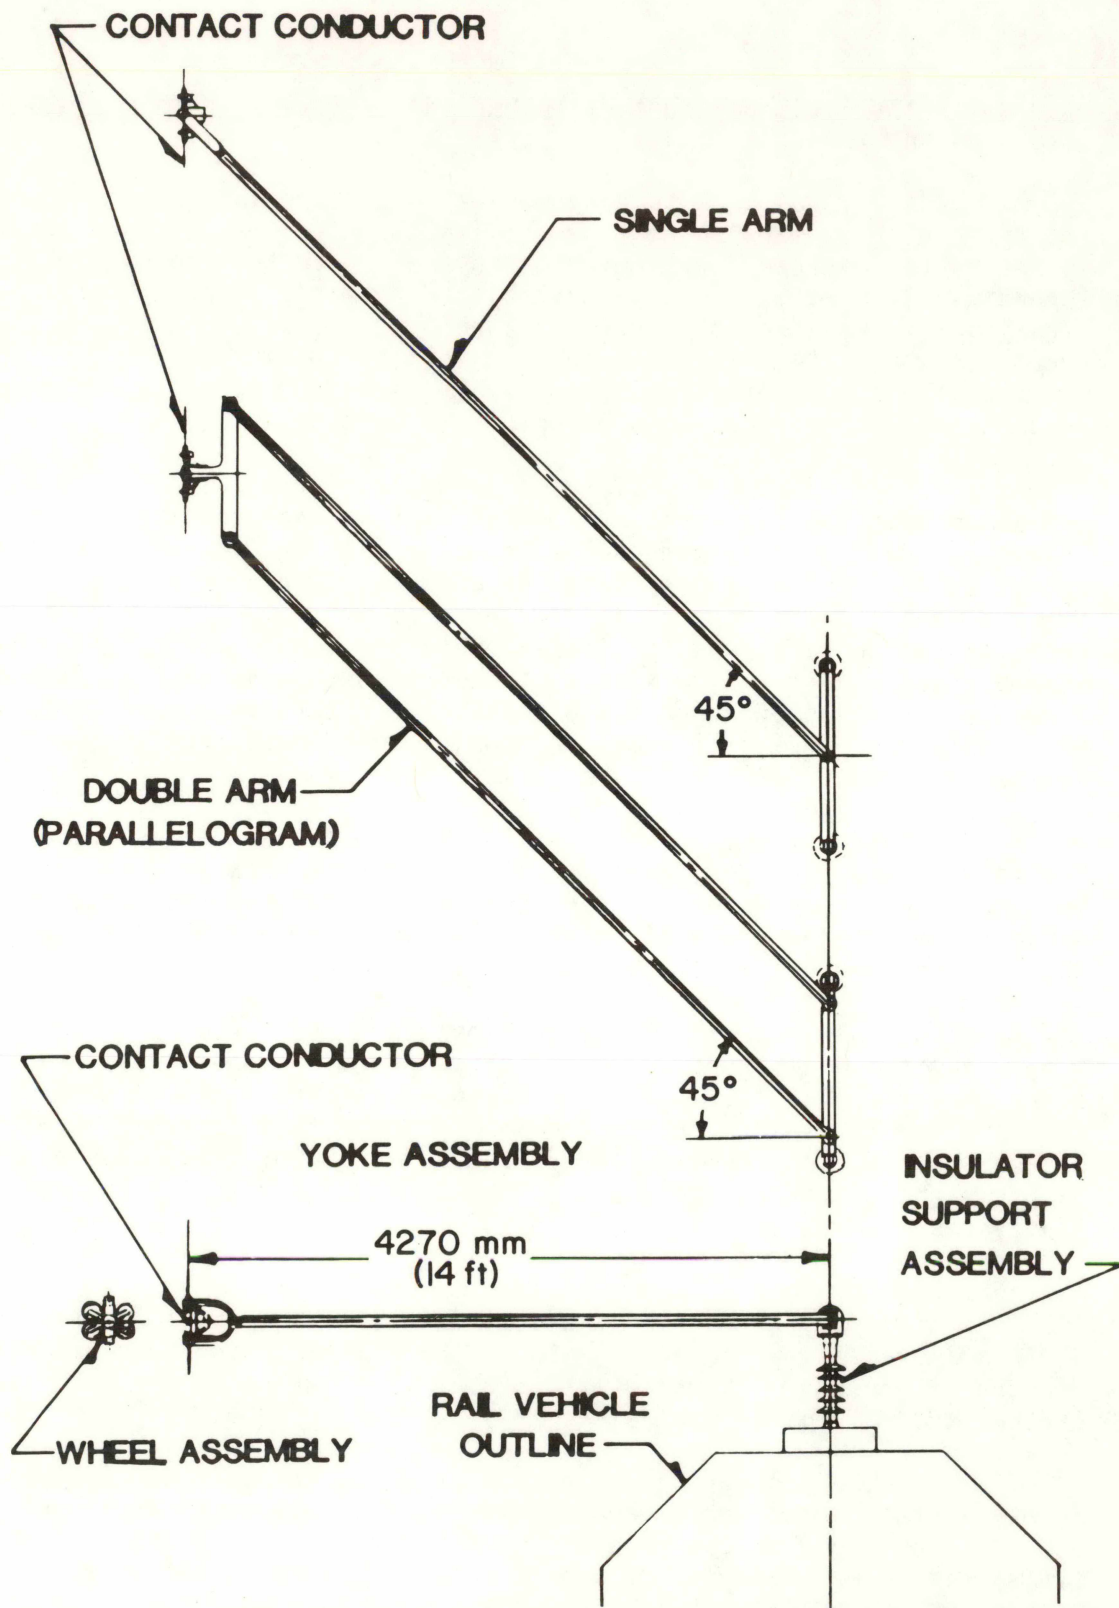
POSSIBLE ARM ARRANGEMENTS FOR THE TRAVELLER ASSEMBLY.
